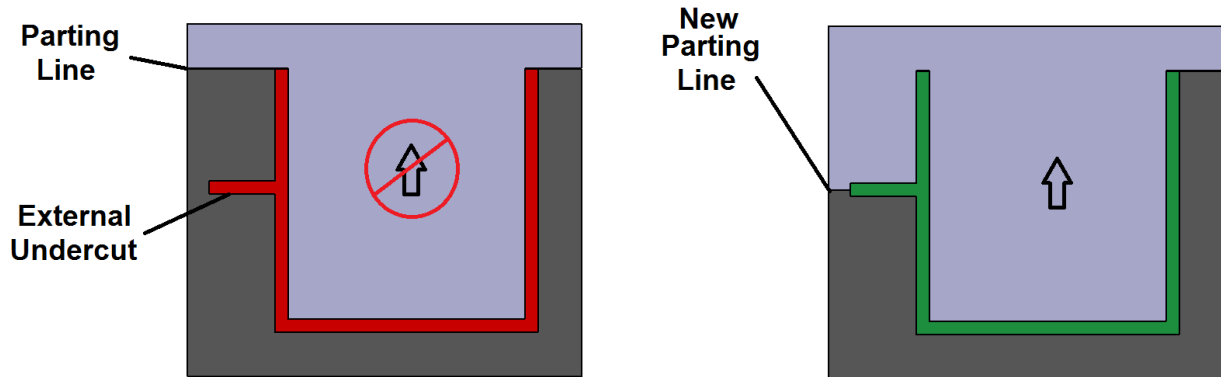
External undercut and a solution to an external undercut by adjusting the parting line of the tool.
